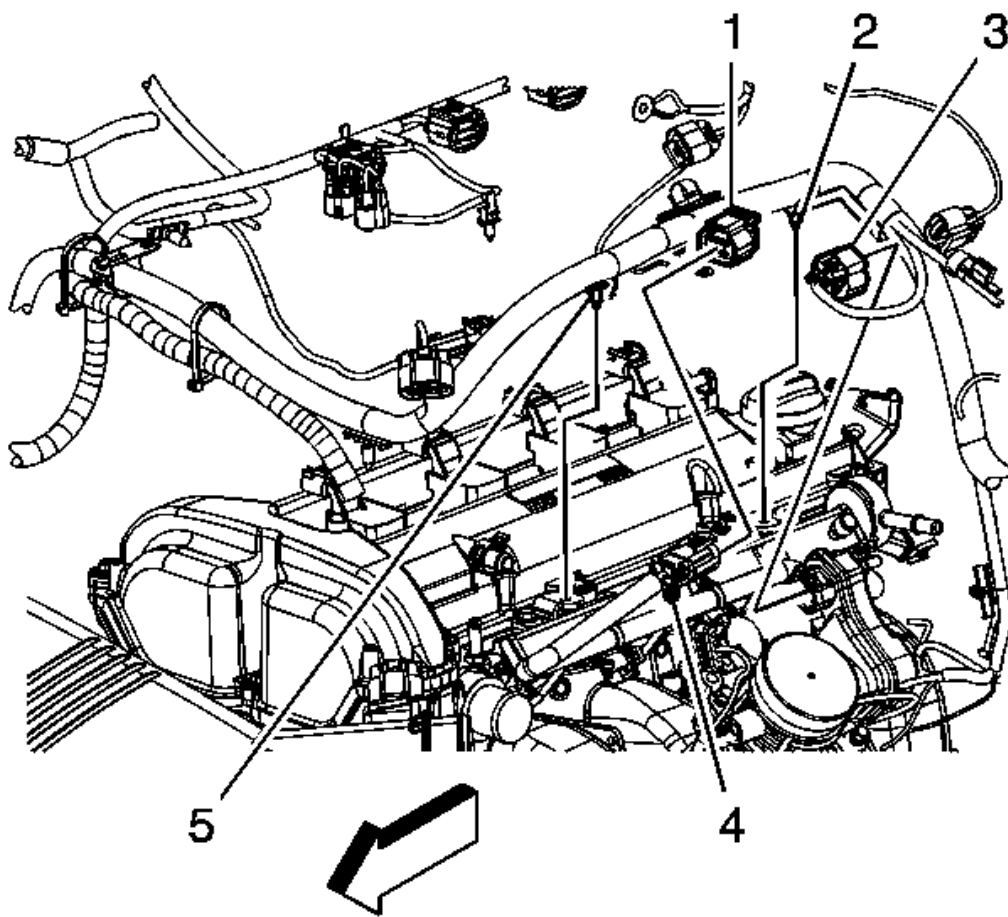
View Of Fuel System Electrical Connectors & Harness Clips
